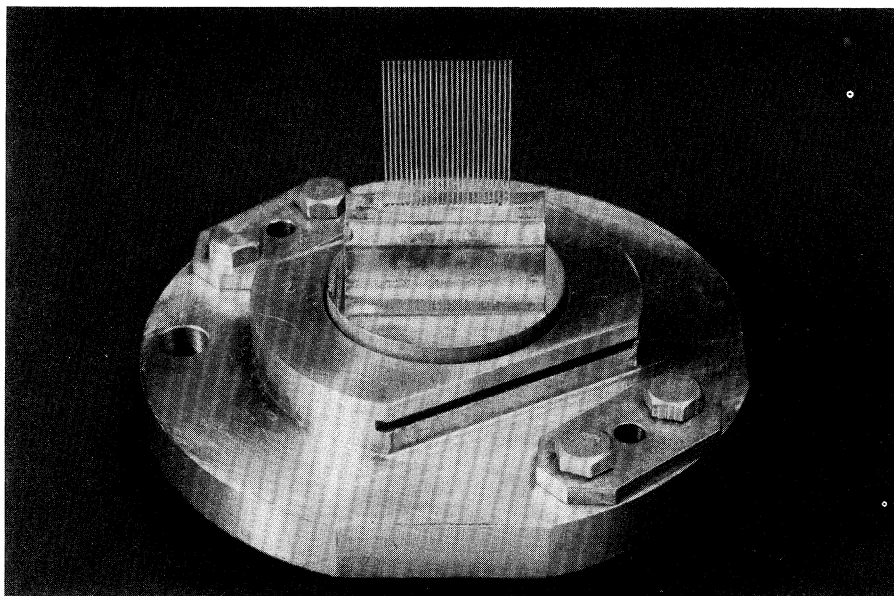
Multiple glass capillary fixture for drilling small holes. (Courtesy Rolls-Royce Ltd.)
